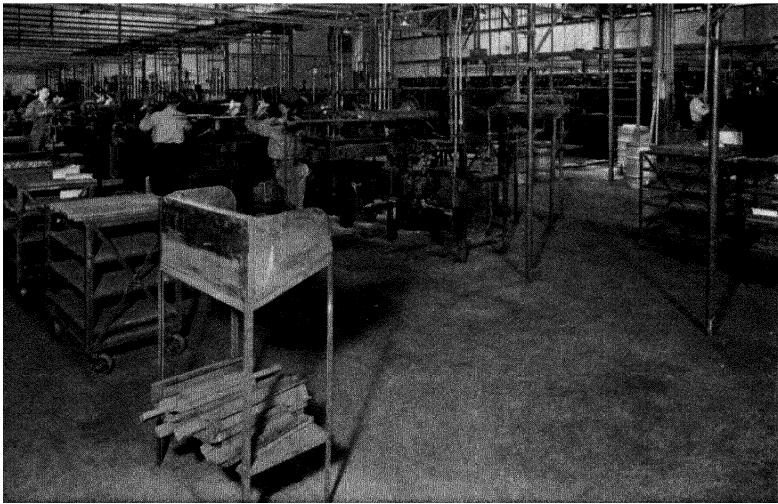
View of sintering furnace department for the manufacture of cemented carbides (courtesy of Carboloy Co., Inc.).
